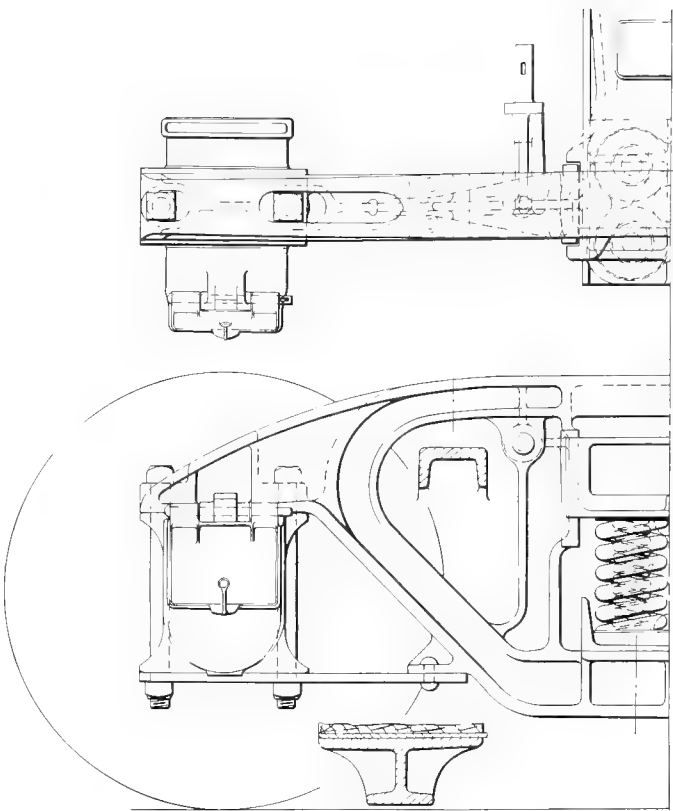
Gould Truck Frame, Z-Type Bolster and Journal Boxes for 50-Ton Capacity Cars. Gould Coupler Company.
